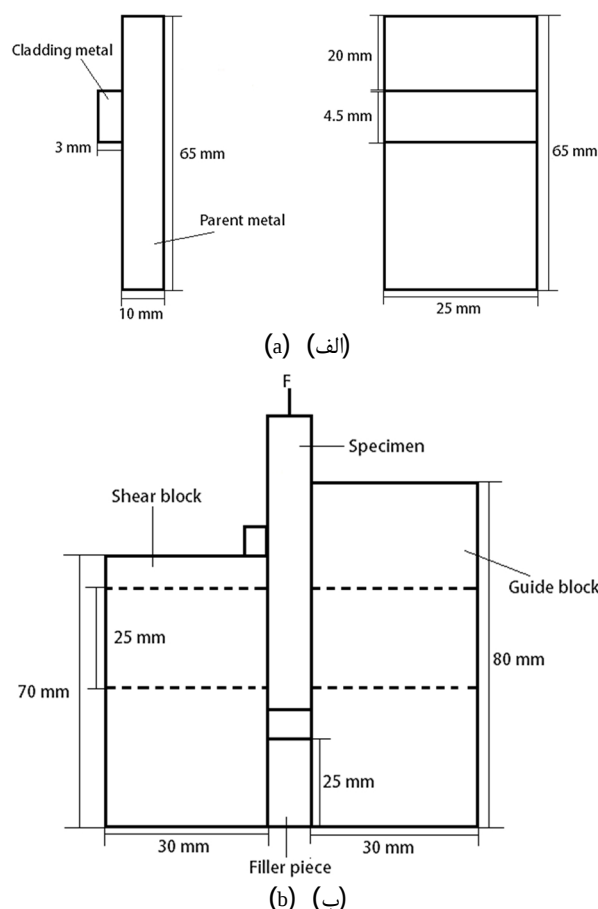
Tensile-shear strength test method and sample according to DIN 50162 standard a) The test sample b) Fixture and test method.
